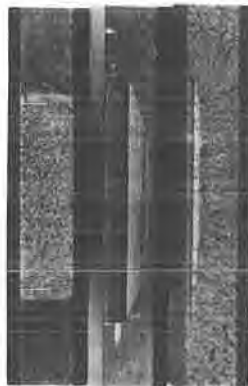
Examples of Fracture Surfaces of Tube Burst Specimens (hydrogen content: 250ppm, tested at room temperature)
